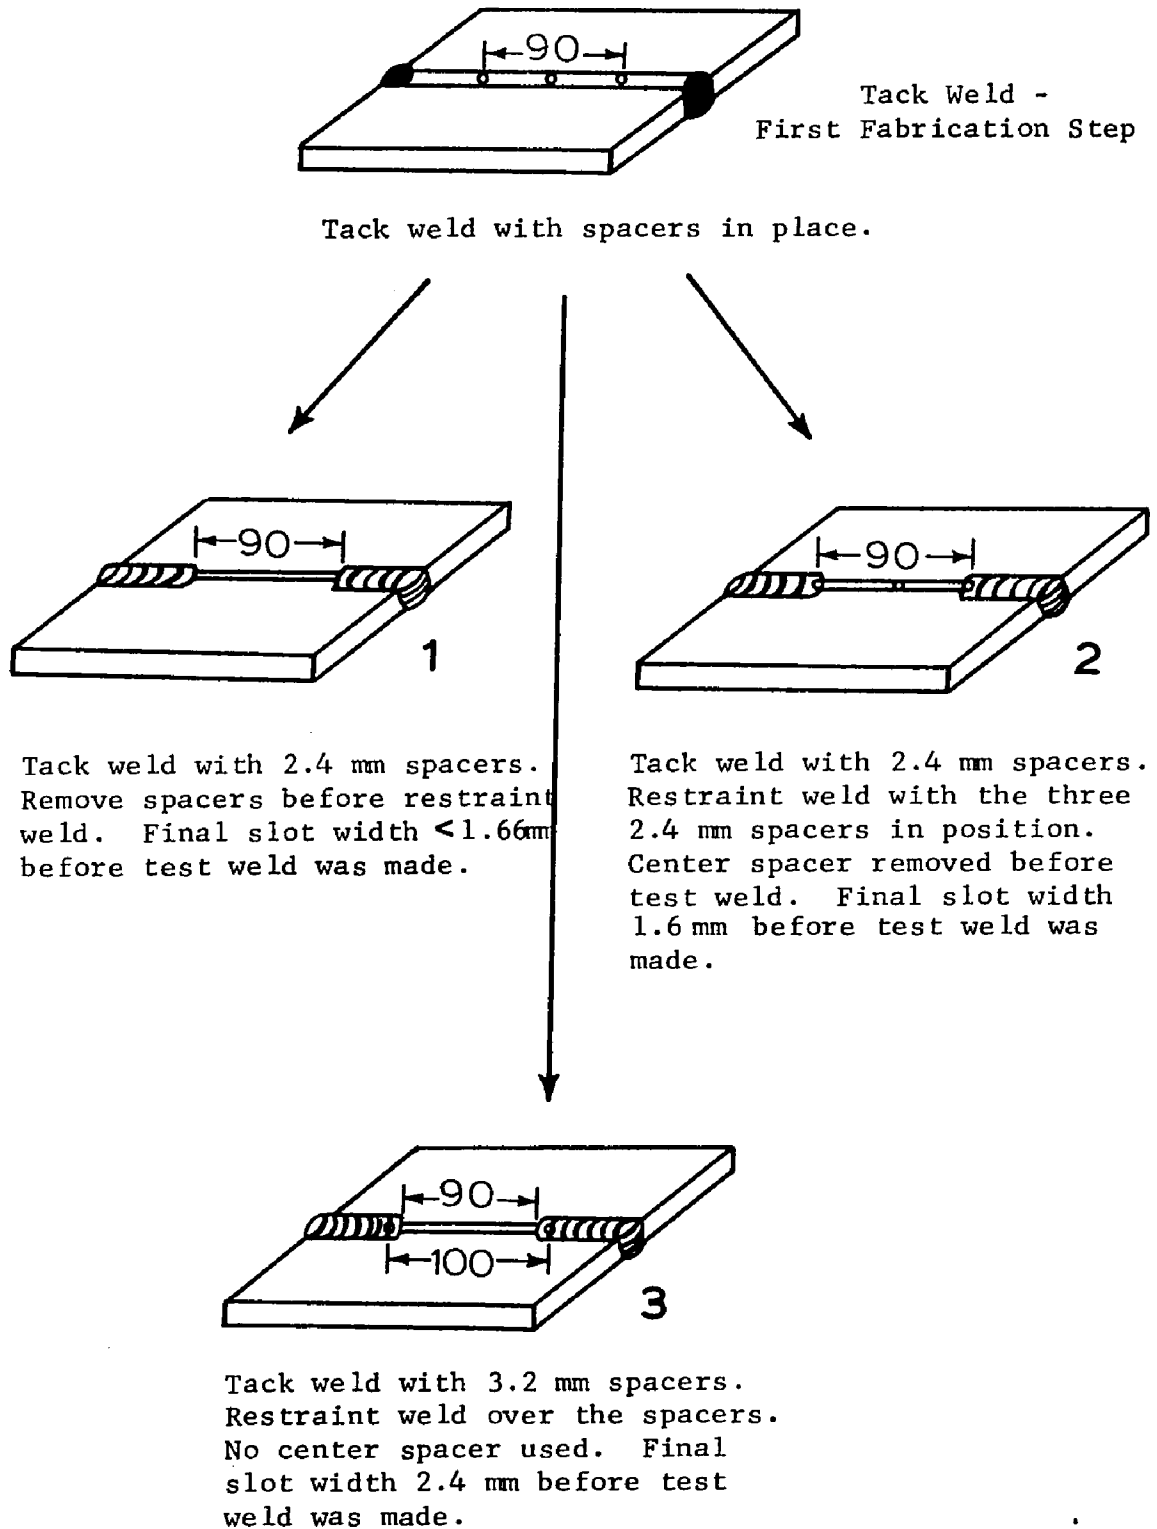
Slot Weld Specimen Fabrication Sequence.
